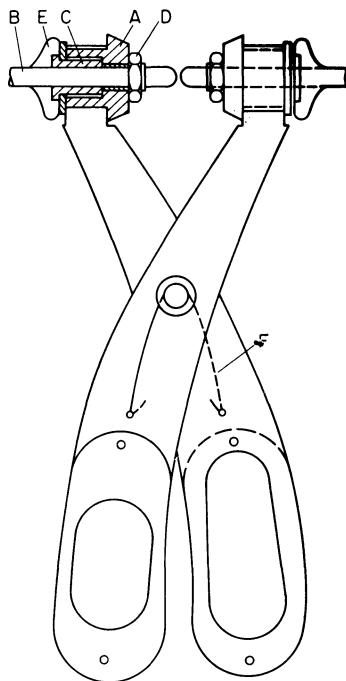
Tool for sealing-off quartz exhaust tubes. Reproduced from Schneidmesser¹¹⁰⁵
